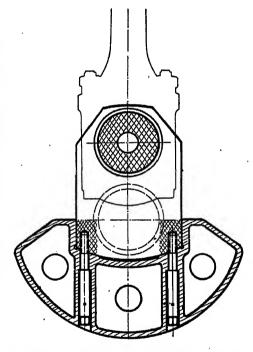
Counterbalanced Crank of Two-cylinder Engine.
